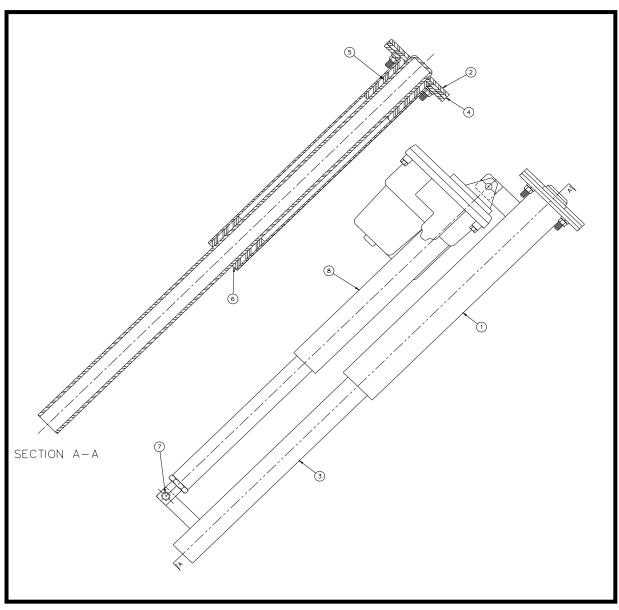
, GPE SAMPLER PARTS DRAWING
